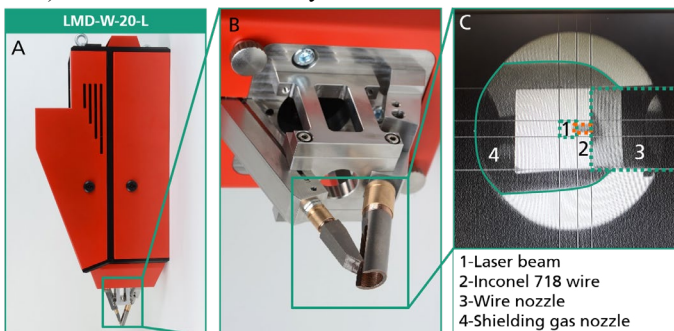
A- LMD-W-20-L processing head. B- Wire nozzle for lateral feeding and shielding gas nozzle. C- Wire-beam adjustment by coaxial camera.
